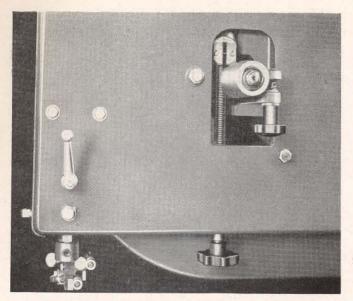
Rear of Upper Cabinet, Showing Tension and Tracking Adjustments.
